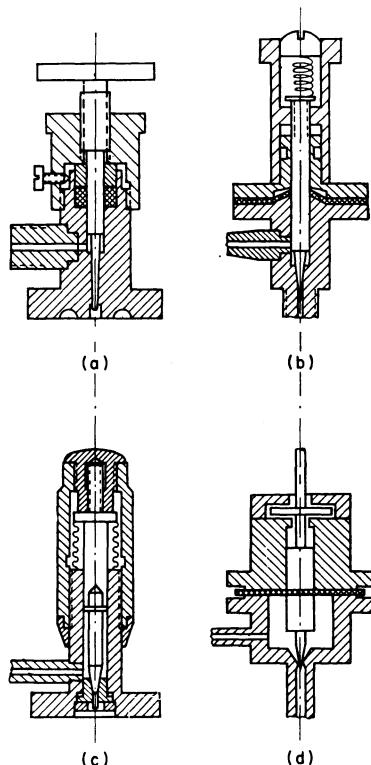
Needle valves: (a) with cylindrical elastomer shaft seal; (b) with Wilson seal (Edwards³²⁸); (c) with bellows and differential screw; (d) with diaphragm seal (Alexander¹⁸)
